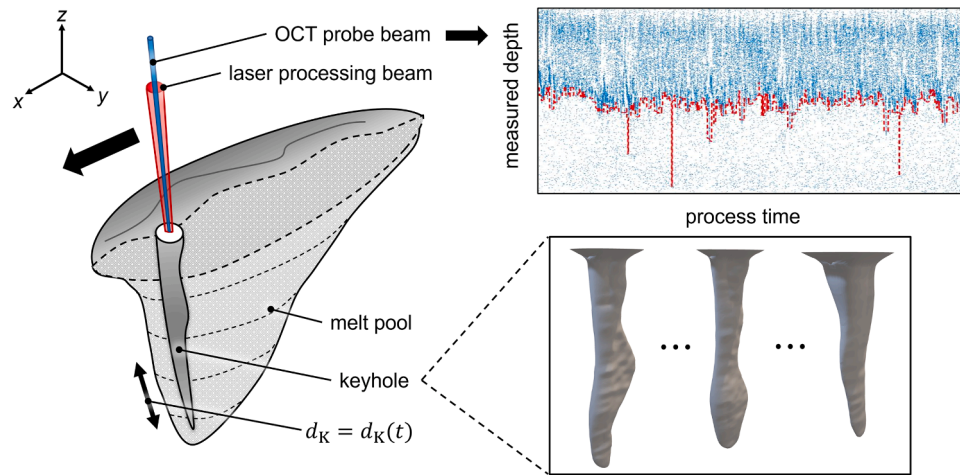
Schematic of a process zone during a laser deep penetration welding process accompanied by OCT measurements with exemplary data obtained from these OCT measurements and X-ray based 3D keyhole reconstructions.
